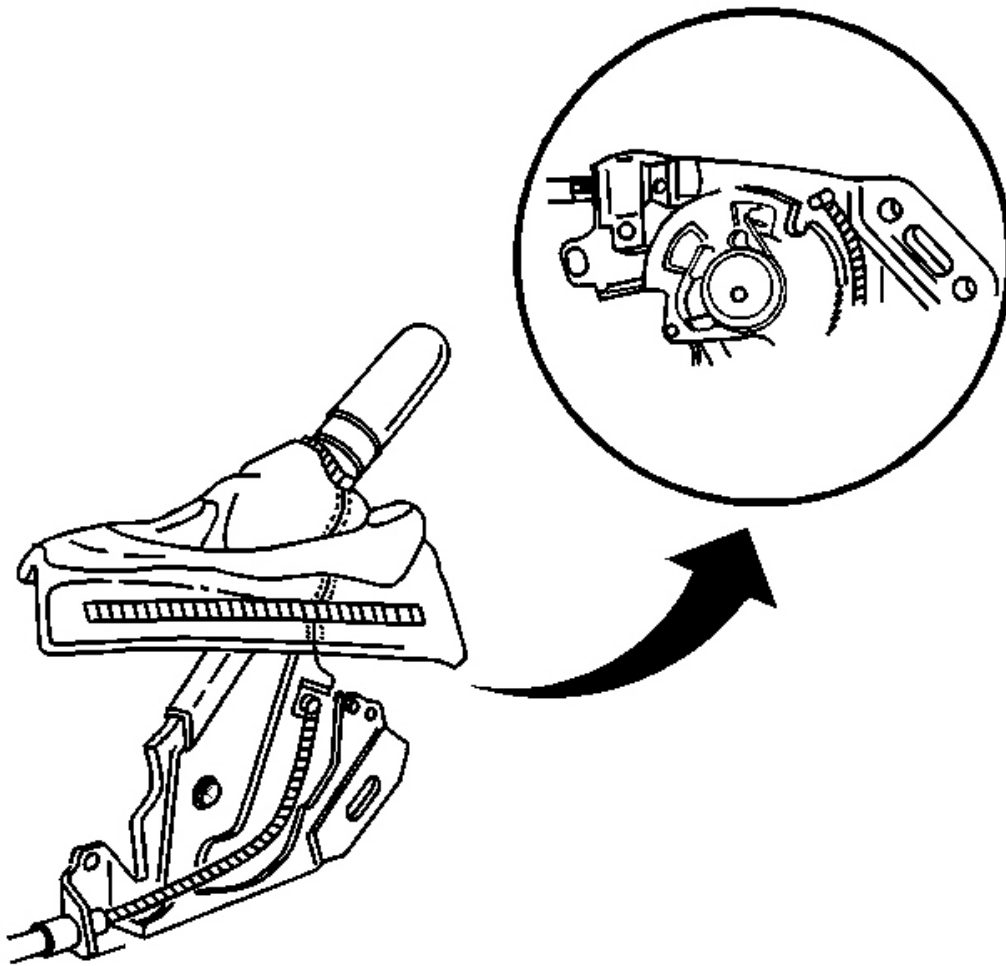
Front Parking Brake Cable To Drive Sector & Park Brake Lever Assembly
